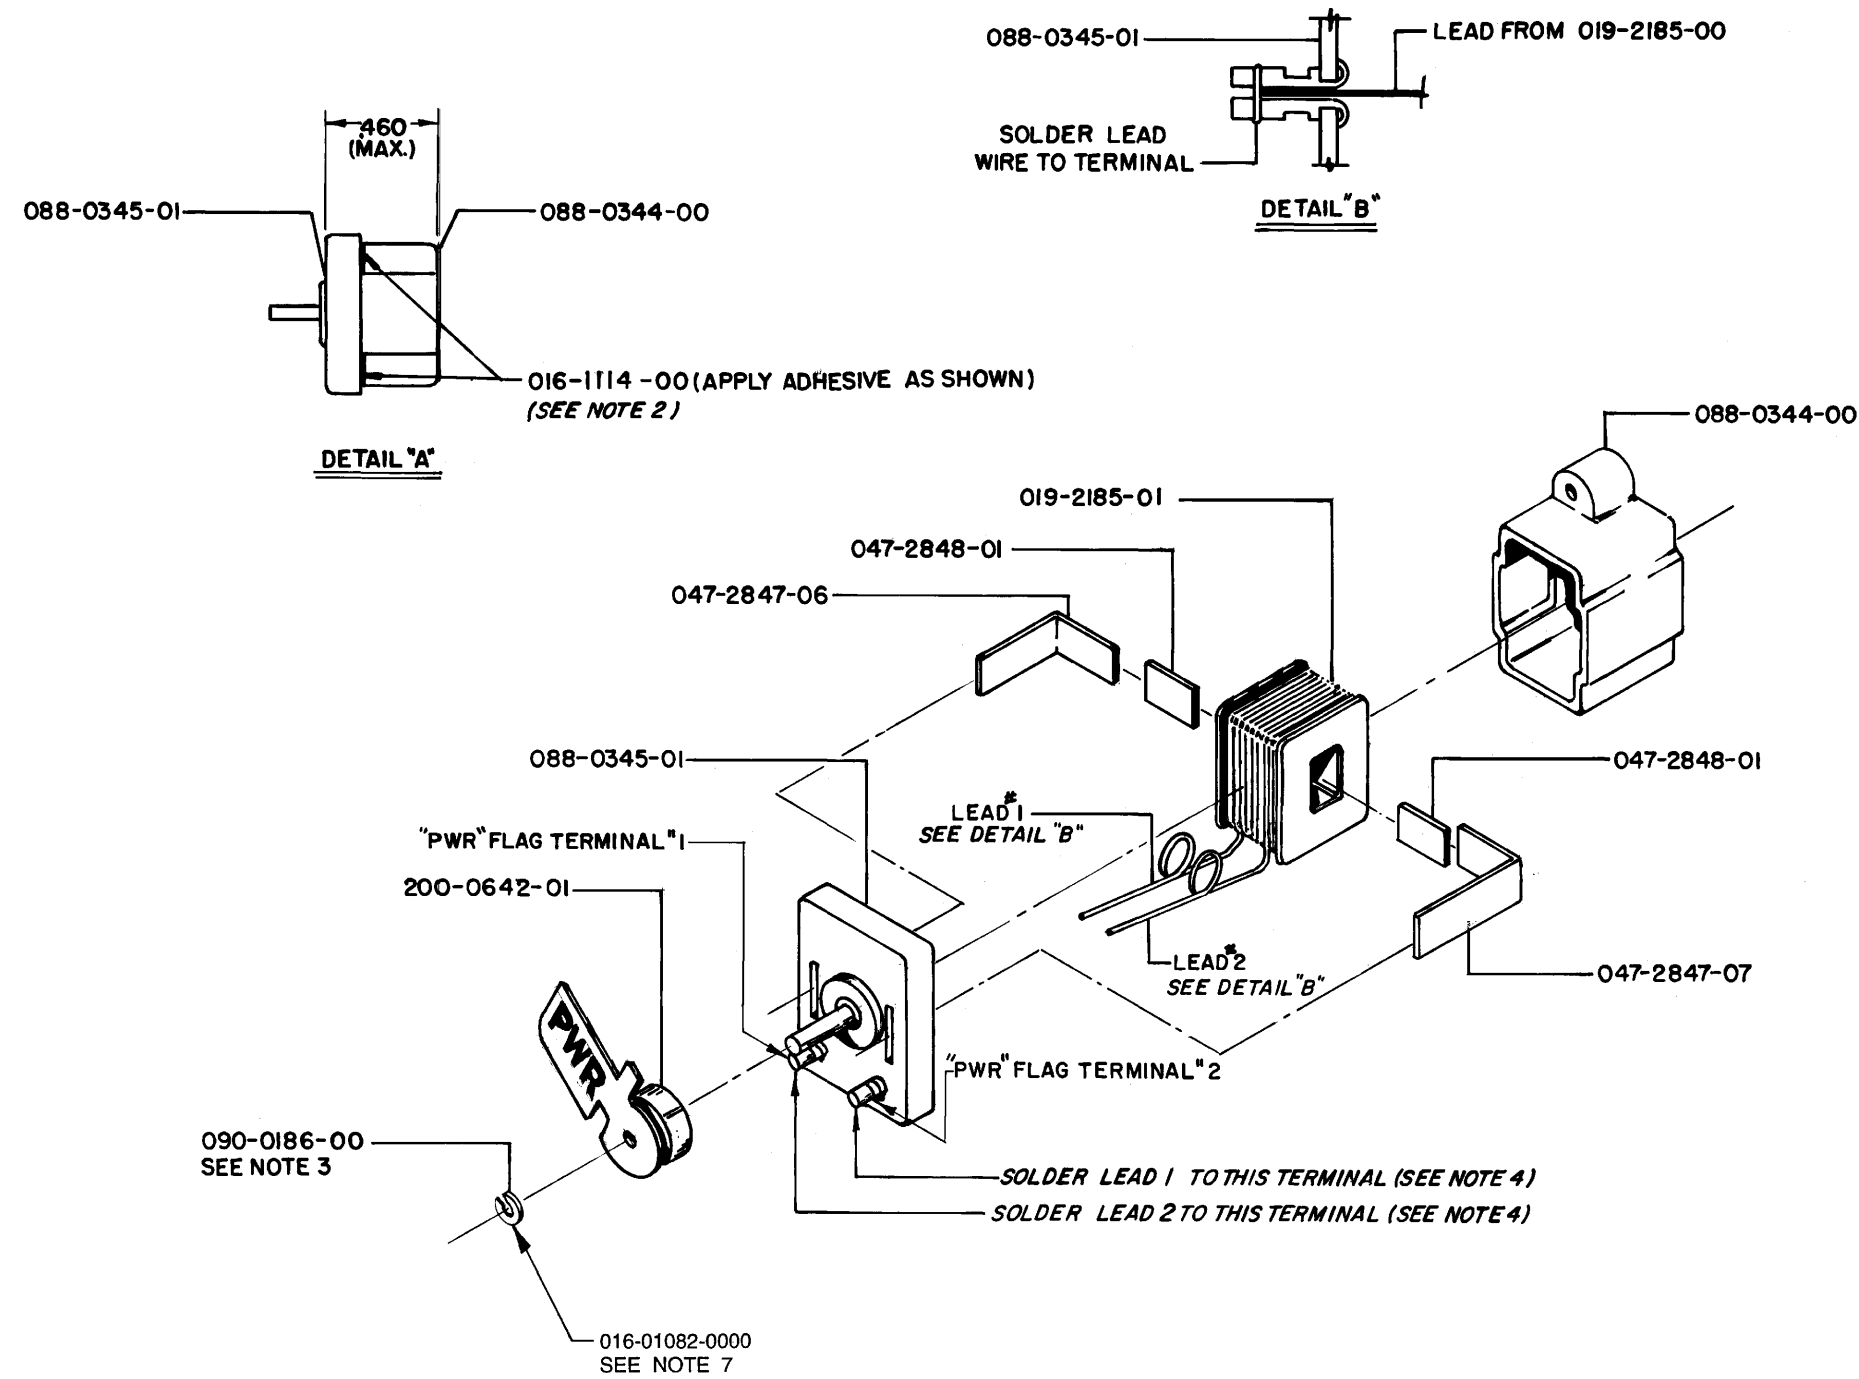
KI 525 FLAG MECHANISM ASSEMBLY
